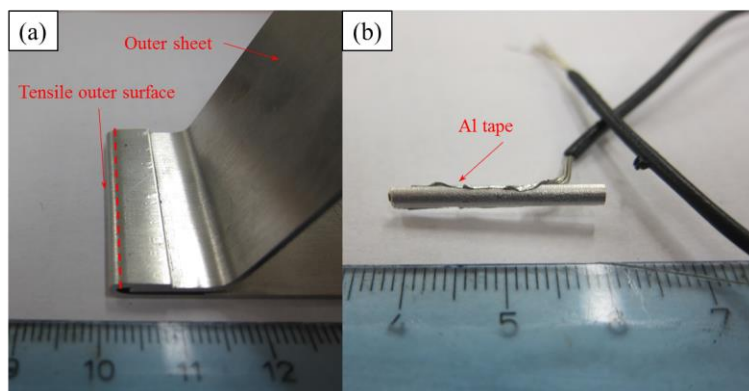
Photographs of (a) the tensile outer surface of an uncoated hem flange coupon, red line indicates the cutting line; (b) a sample of tensile outer surface before cold-mounting with copper wire attached.
